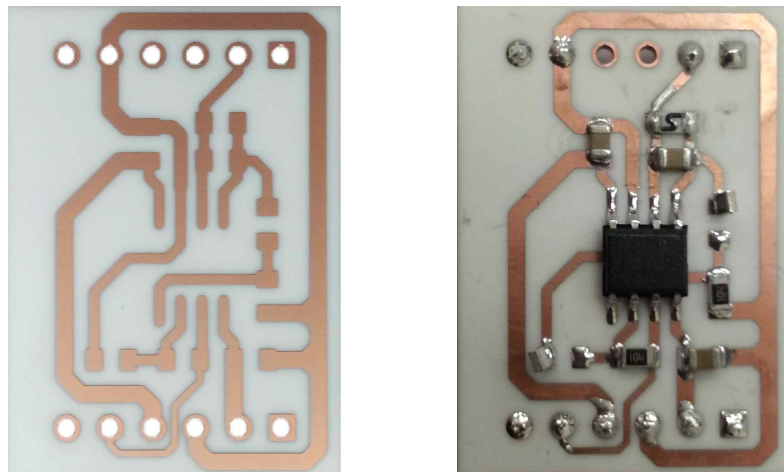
Al_2O_3 based ceramic PCB (left) and component assembly (right)
